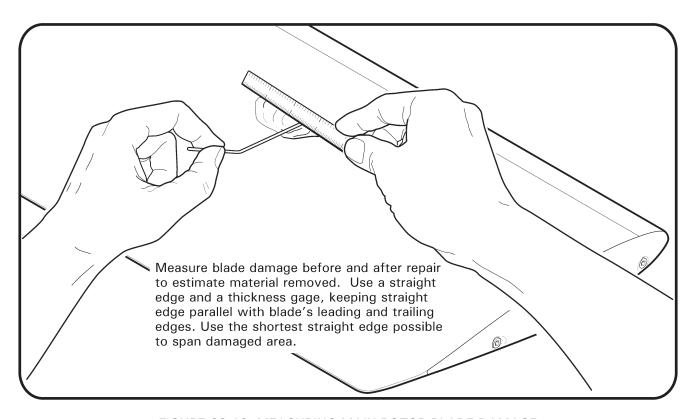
MEASURING MAIN ROTOR BLADE DAMAGE
